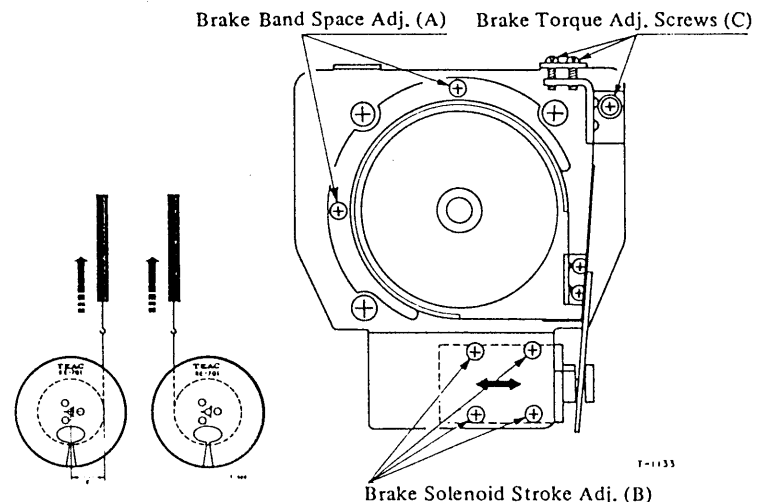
Brake Torque Measurement and Adj. Locations
